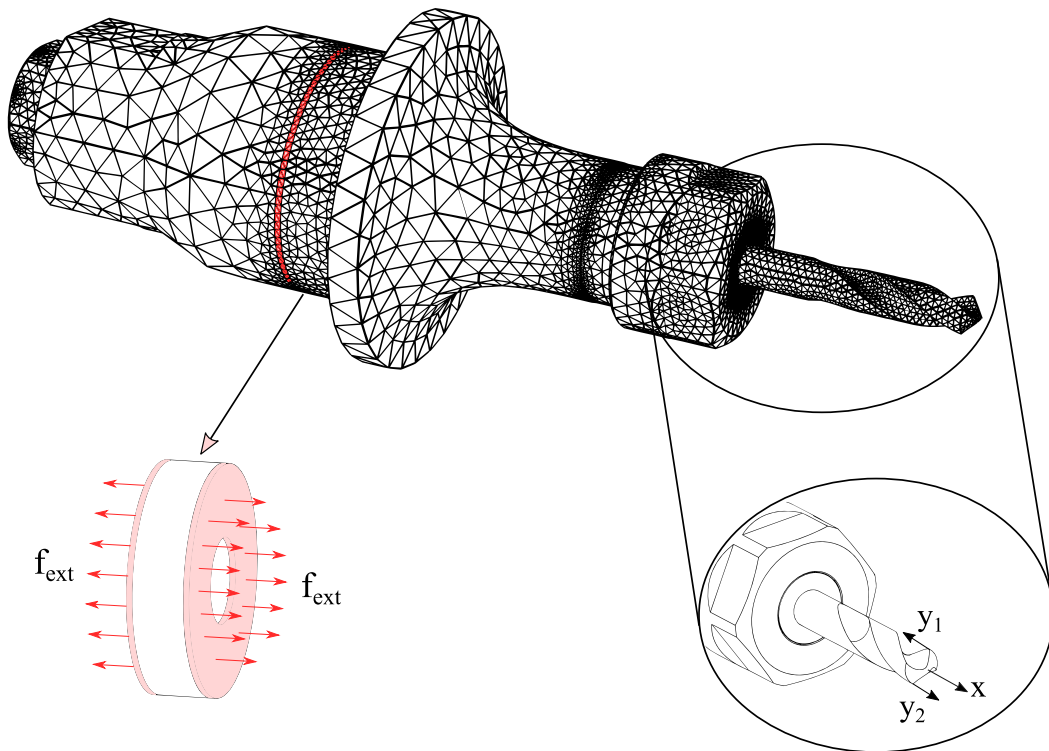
Excitation and measurements of axial tool holder in COMSOL Multiphysics
